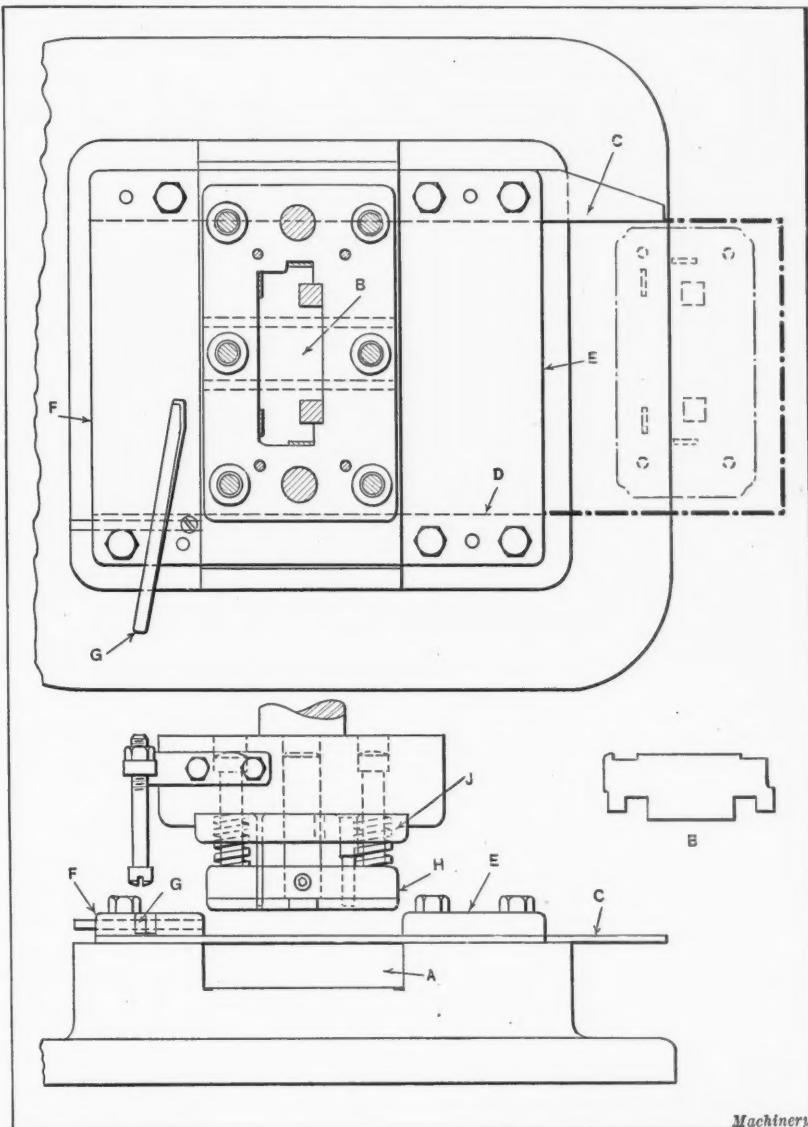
Piercing Dies having Opening formed by Machined Blocks set into the Die-shoe
